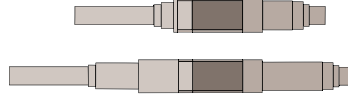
Rotor structure for TC winding machine (top) and 50% longer middle part for a full pitch DW machine (bottom).
